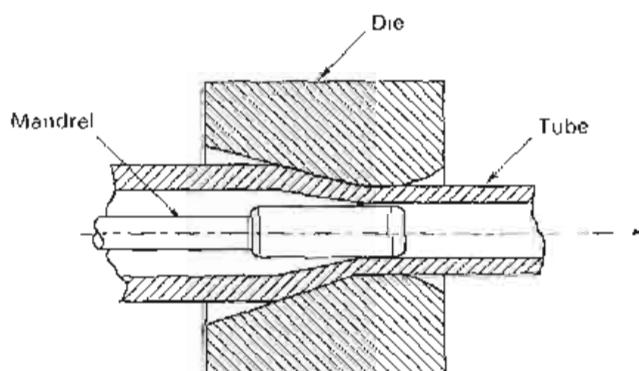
Cold-drawing smaller tubing from larger tubing. The die sets the outer dimension while the stationary mandrel sizes the inner diameter.
